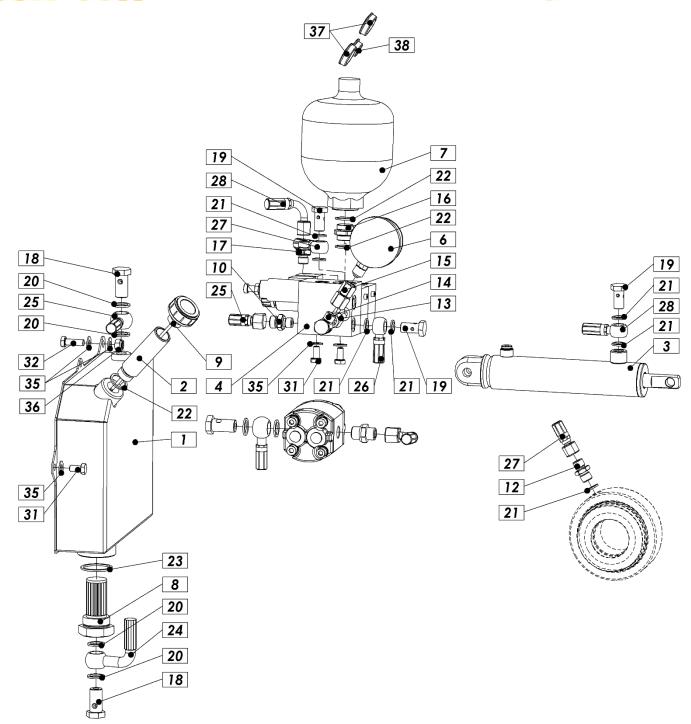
7002.32.00.0 – Hydraulic assembly 65H/85H.
